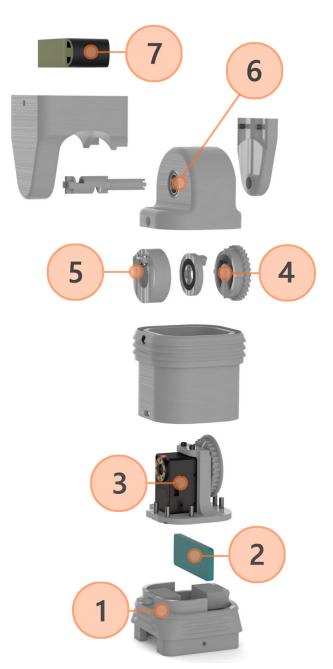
An exploded view of a joint module. (1) screw-less assembly mechanism; (2) micro-controller; (3) actuator; (4) elastic gear; (5) rotary encoder; (6) bearing; (7) battery-pack.
